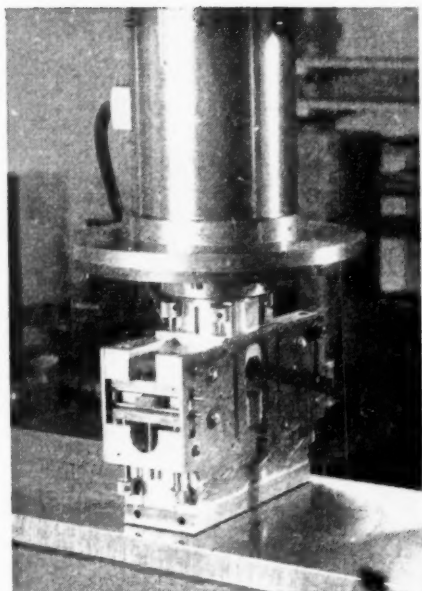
General View of Load Cell Attached to Upper Crosshead of Machine.
